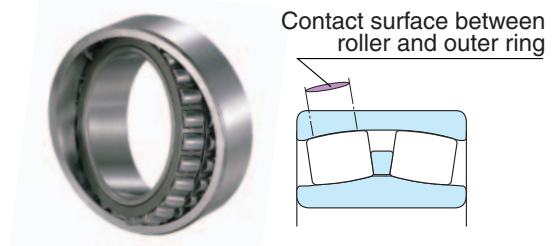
Typical Failure Mechanism of Roll Support Bearing in Continuous Casting Machines
